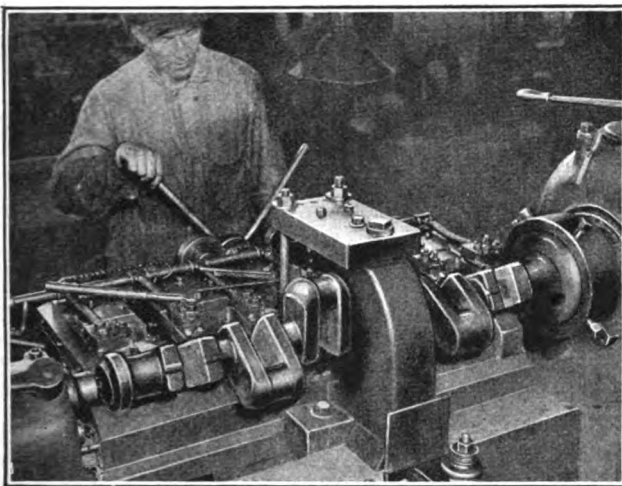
ROUGH-TURNING ON LO-SWING LATHE. FIG. 2. FRONT VIEW OF SAME MACHINE
